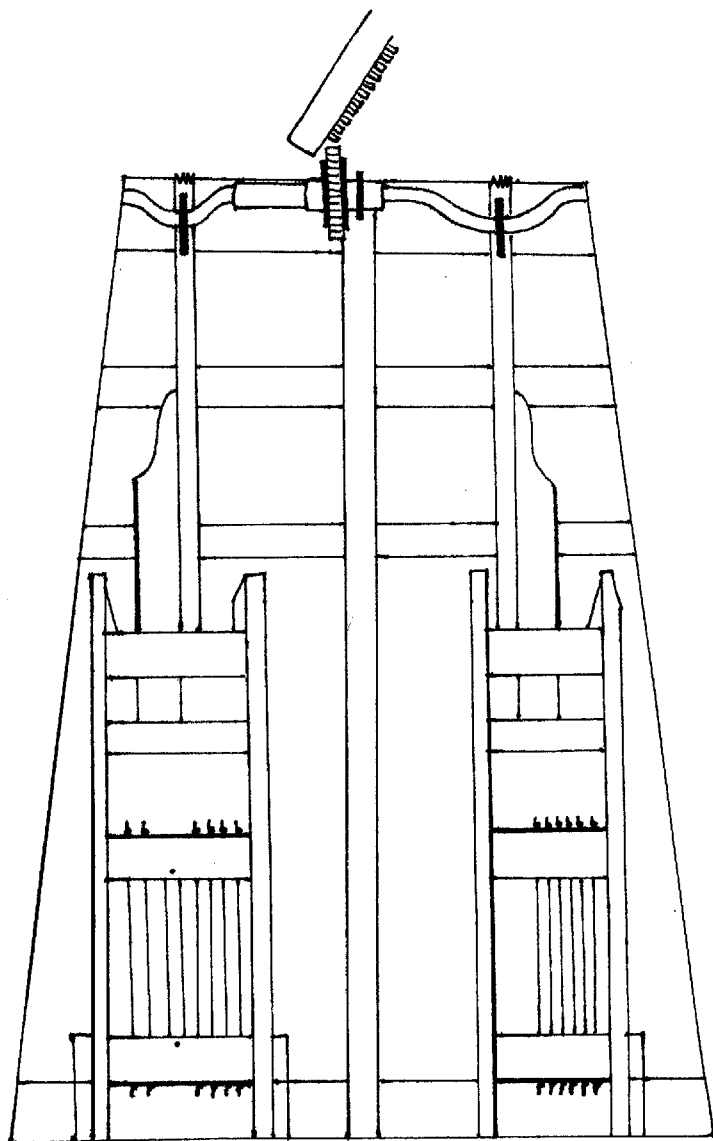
The basic internal mechanism of a wind-driven sawmill are shown here simplified from more comprehensive drawings by Simon Hart and Peter Spier (see text). The gear from the windshaft (axle) is shown at the top meshing with the gear for the crankshaft. Rods attached to the crankshaft move up and down to raise and lower the saw frames. There are twelve blades attached to the frames in this sawmill allowing it to do the work of twenty-four men.
